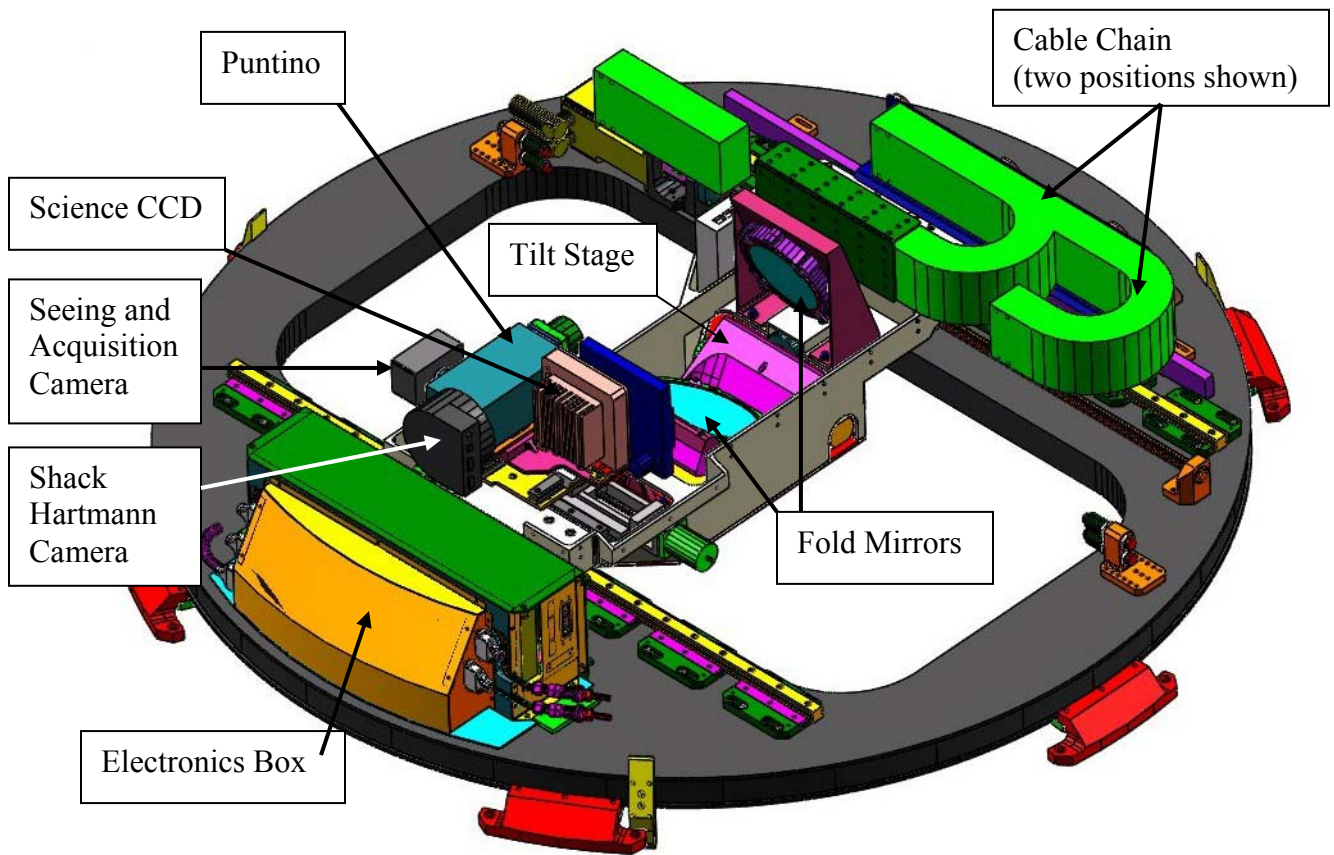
f/5* wavefront sensor with the cover removed. The stage assembly carrying the pickoff mirrors, Puntino and Apogee science camera is deployed to the on-axis position.
